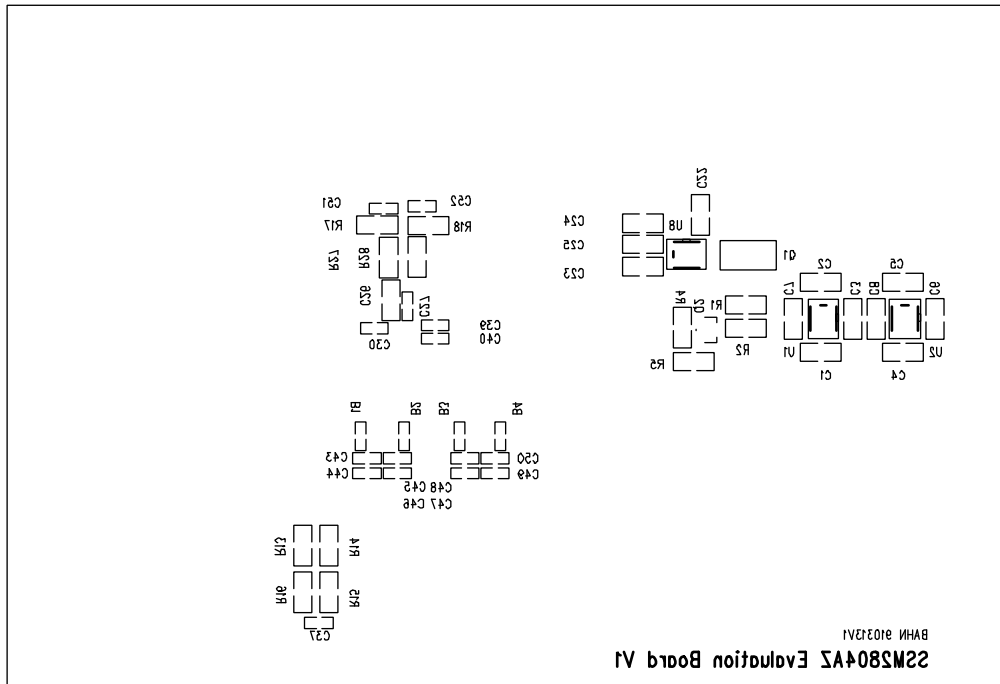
Evaluation Board Layout, Bottom Silkscreen
